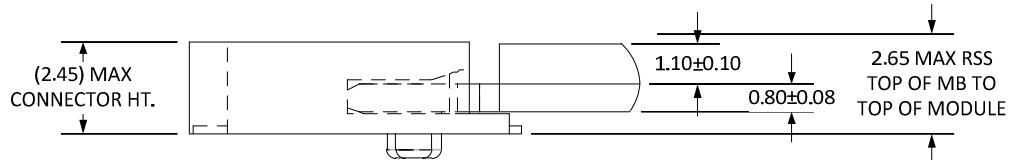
H2.5-S1 - Stack-up Top Mount Single-sided Module for 1.20 Maximum Top-side Component Height and with Higher Clearance above MB
